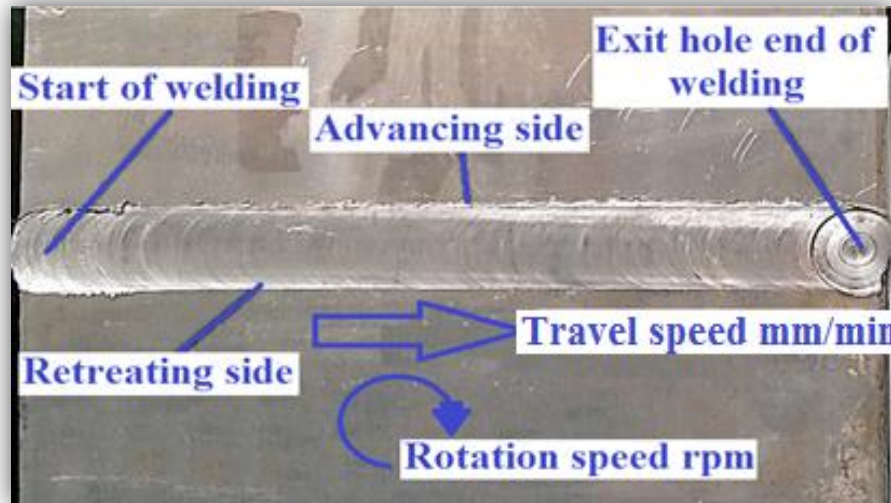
Welded sample explaining welding direction, start, and end of welded joint.
